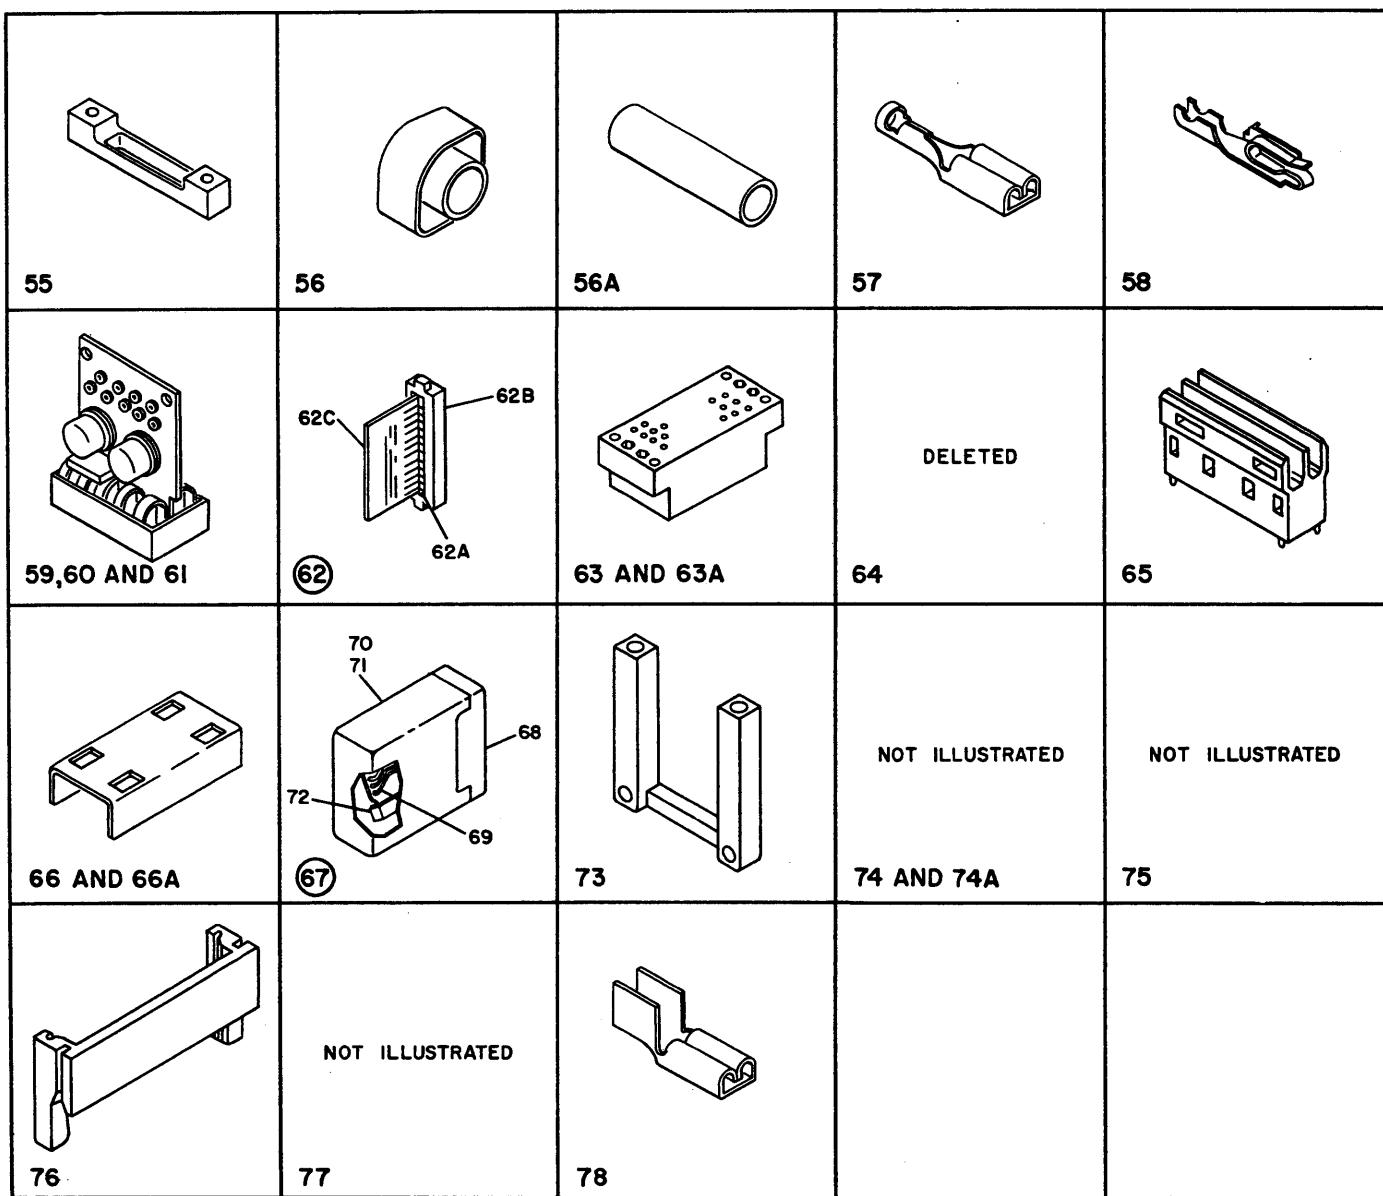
CABLE AND JUMPER ASSEMBLY COMPONENT PARTS. SHEET 3 OF 3. SEE LIST 19.
